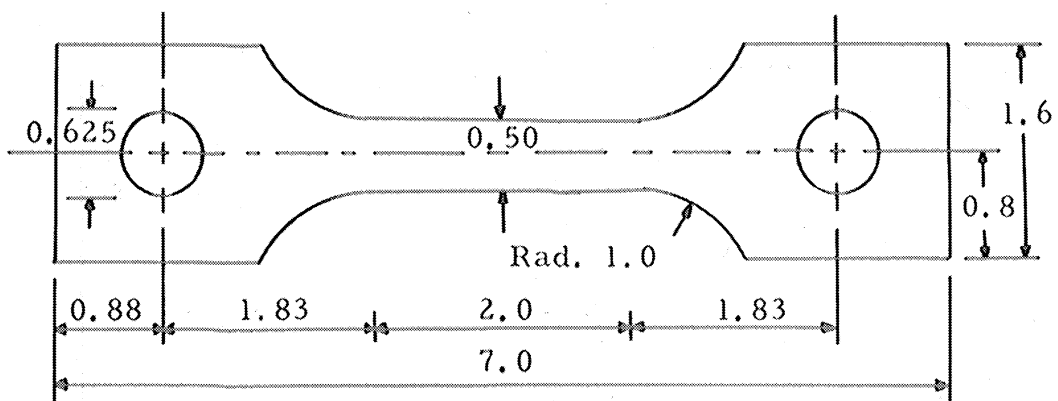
Smooth Tensile Specimen (dimensions in inches).
